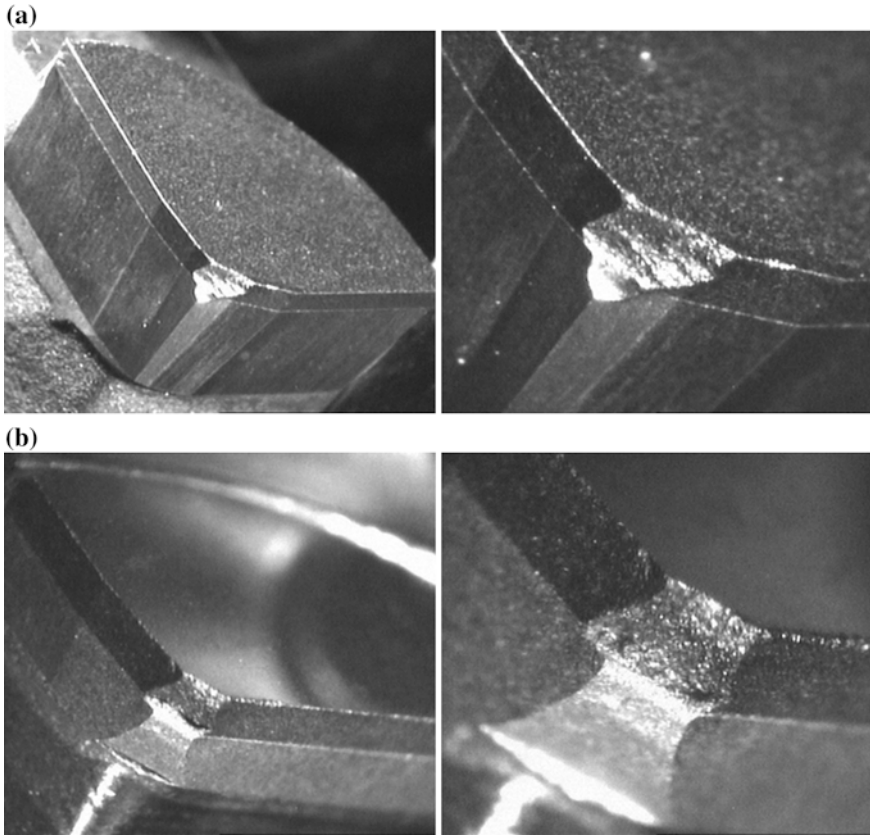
Excessive abrasive wear of a PCD cartage in the presence of casting porosity
